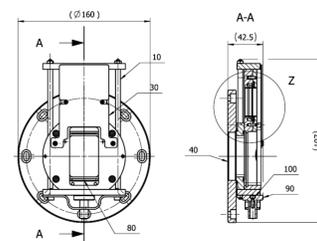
Manufacturing drawings of Filter/Shutter unit [4]
